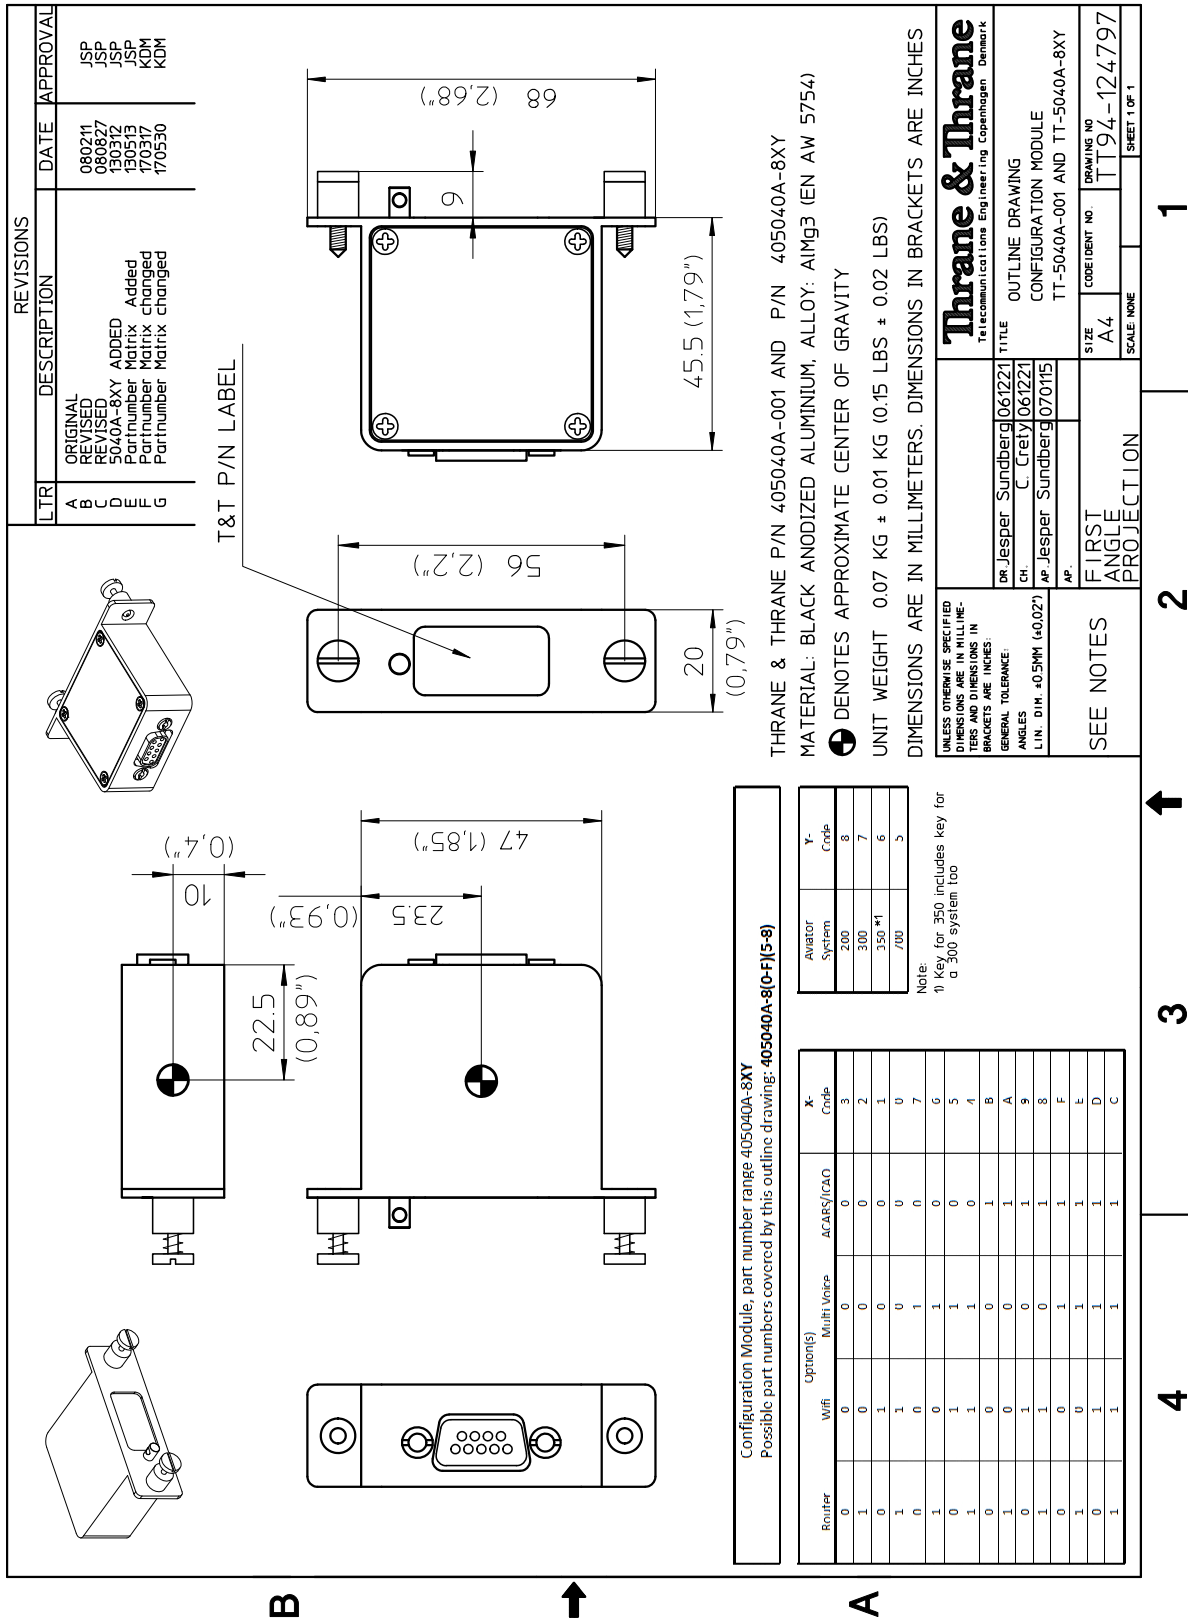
Outline drawing: TT-5040A-001 CM, inserted in the SBU
